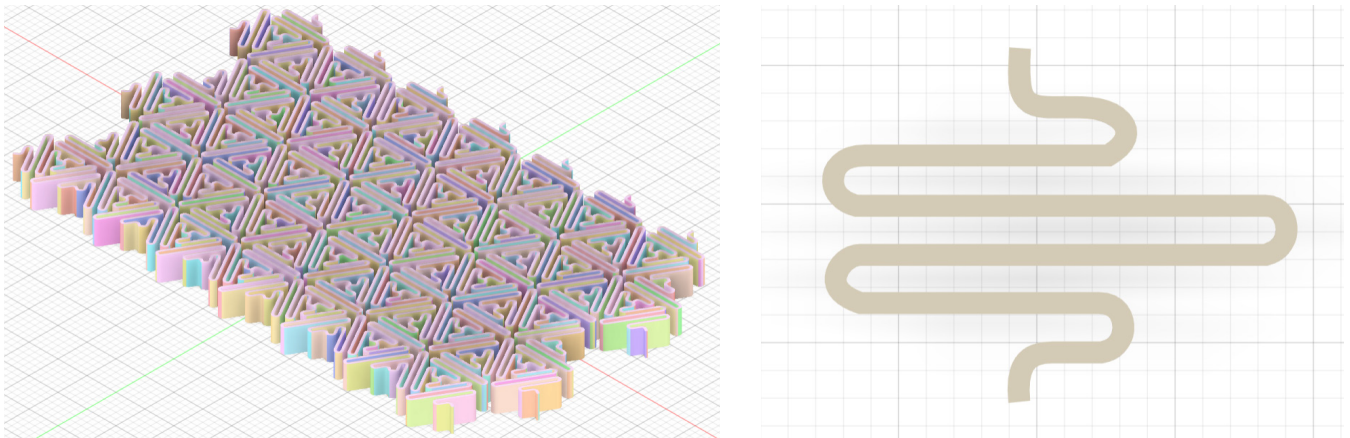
Author's work. Remodelling an existing auxetic structure in Fusion to be used for movement. 2025.
